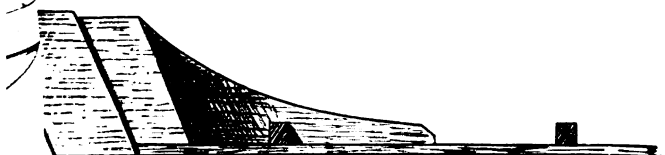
STERN-PIECE FIXED TO FLOOR
